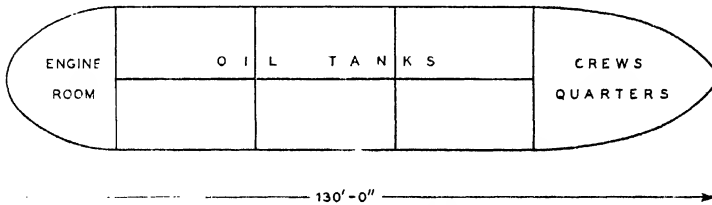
SHOWING HOW THE ALL-WELDED OIL BARGE IS SPLIT INTO UNITS FOR PREFABRICATION
